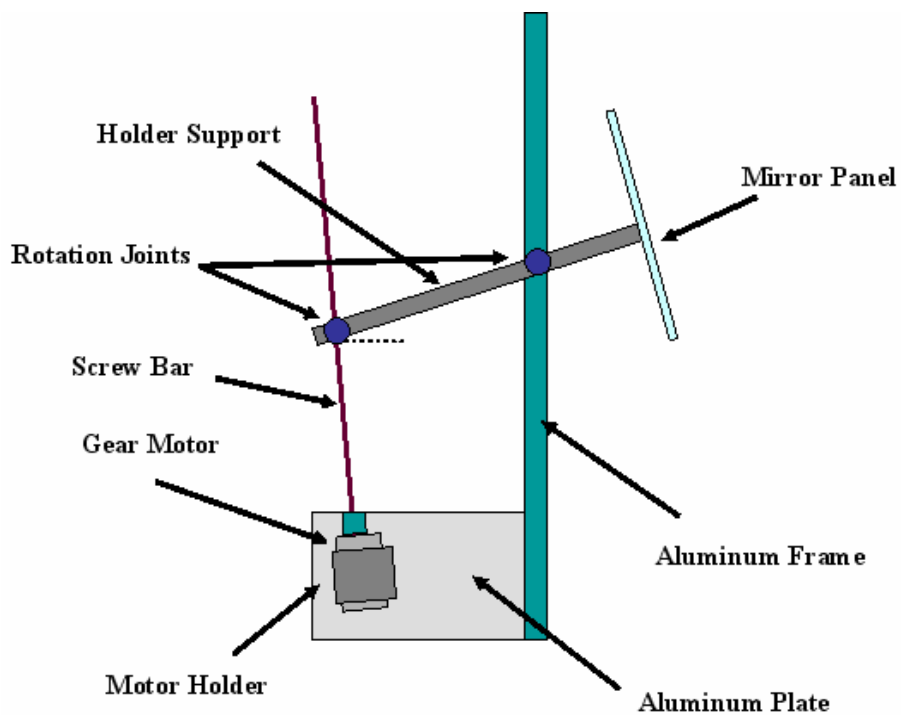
Mirror unit controlled with a gear motor (Top view).
